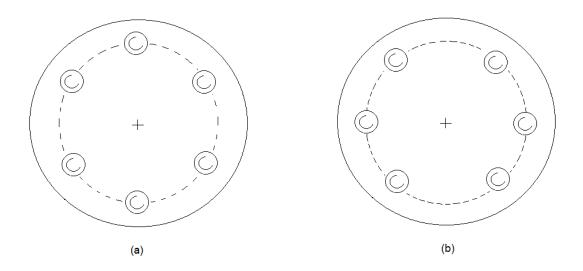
(a)Standard hole pattern found on an adapter plate, (b) Non-standard hole pattern on adapter plate.
